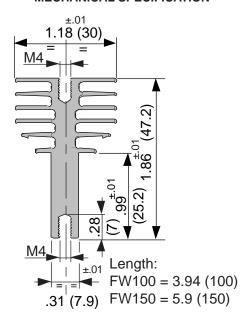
FW100 and FW150 heat sinks; dimensions in inches (mm)
